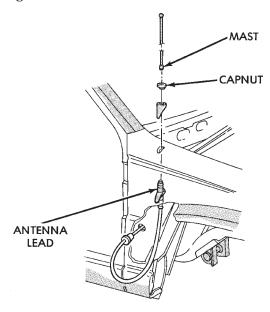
Cap Nut and Adapter Remove/Install - Typical
